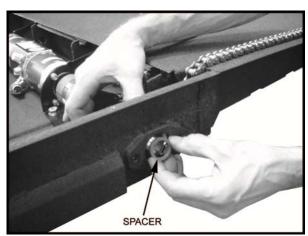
AND 2-12: SPACER AND SELF ALIGNING BEARING (RH SIDE SHOWN)
